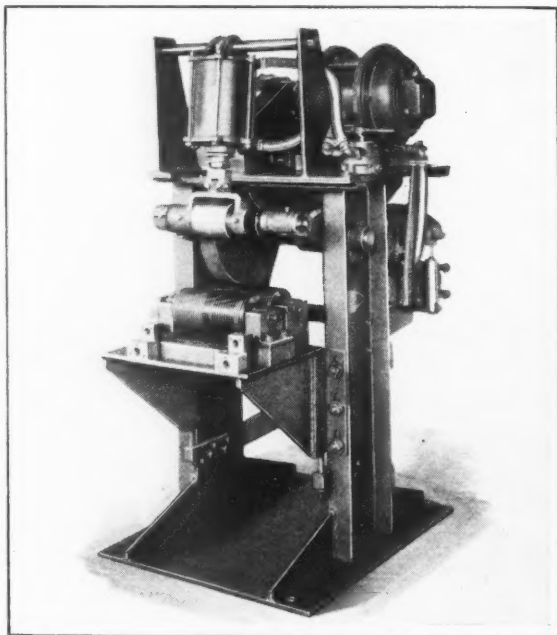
Ryerson Machine for Cutting off and Polishing Boiler Flues and Tubes
